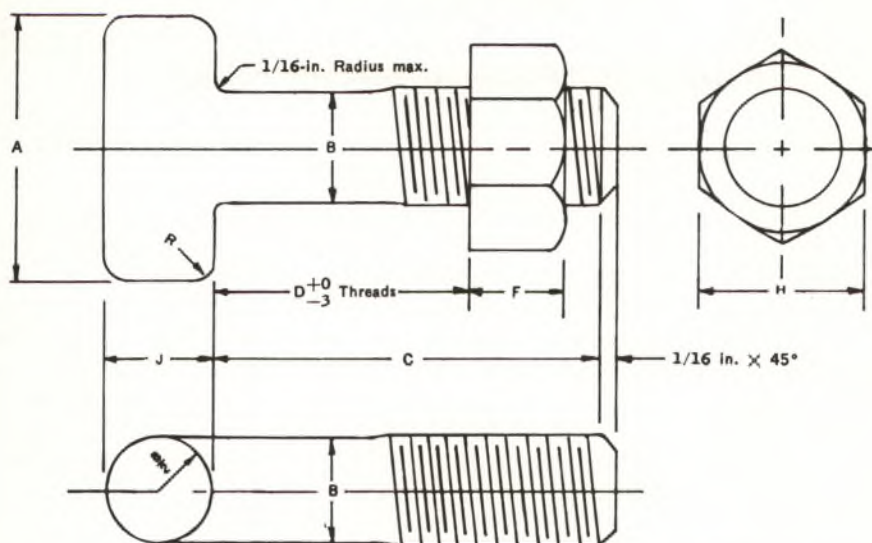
Alternative Design for Alloy Steel Mechanical-Joint Bolts and Nuts.
